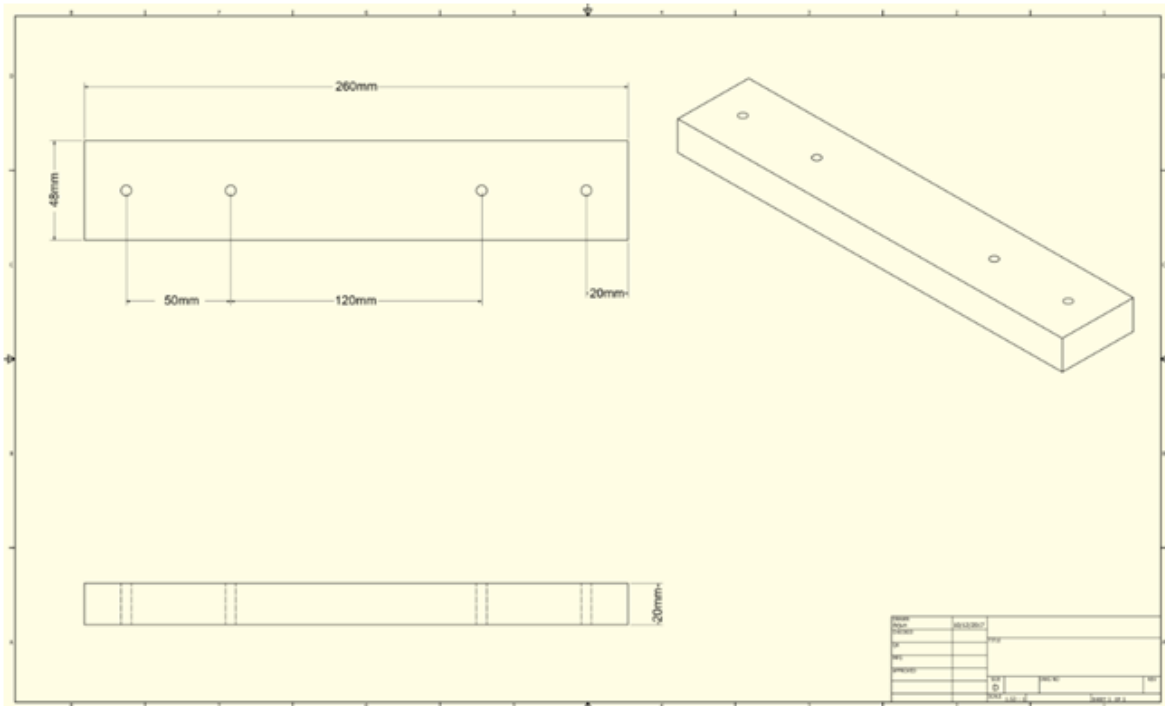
Final Base Plate Calibration Cage Design: x-ray cassette holder mounting bar
